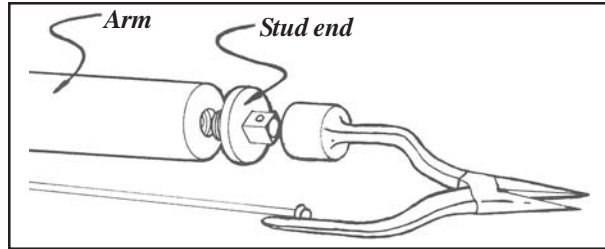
Tool holder attachment to terminal device. (Cable used on plier and scissor attachments.)
